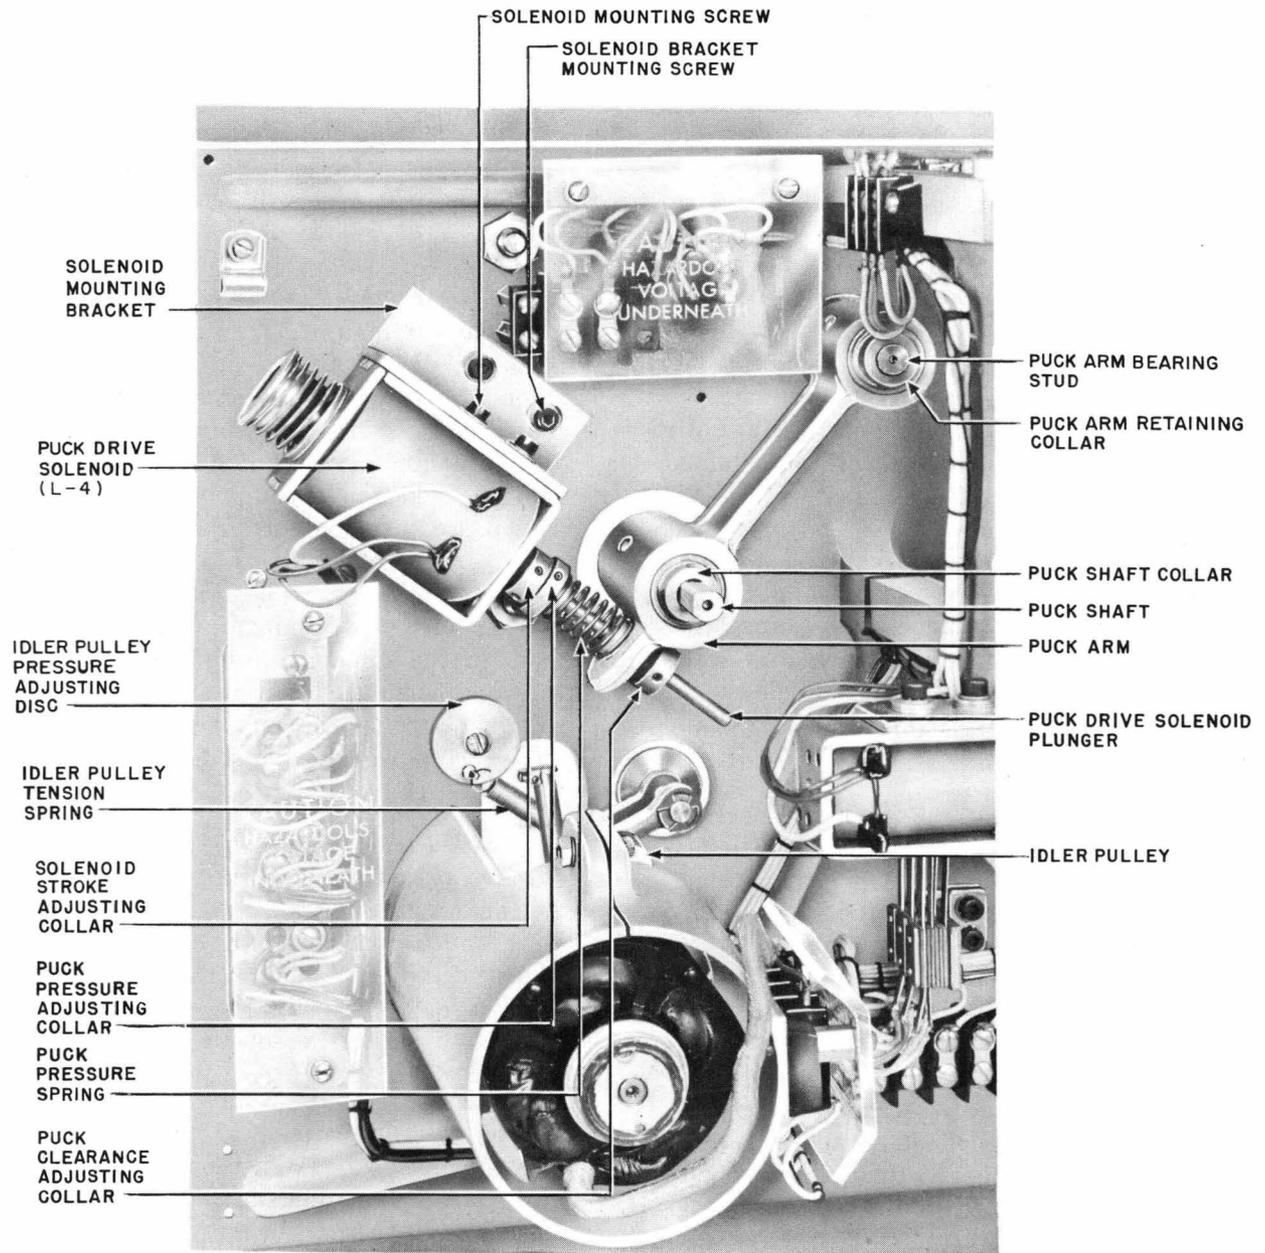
Puck Drive (Driven Pulley and Belt Removed)
